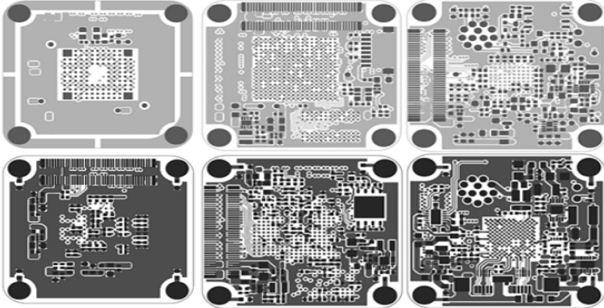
PCB Artwork of Small 360° Oral Scanner Embedded Board.
